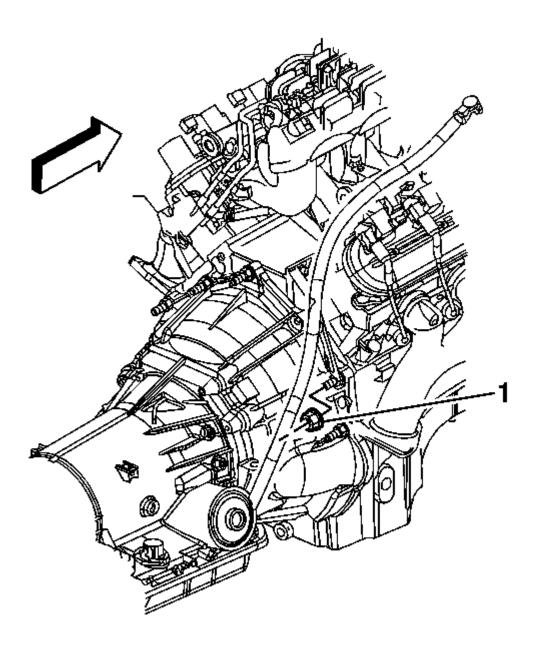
View Of Transmission Oil Level Indicator Tube Nut Courtesy of GENERAL MOTORS CORP.
